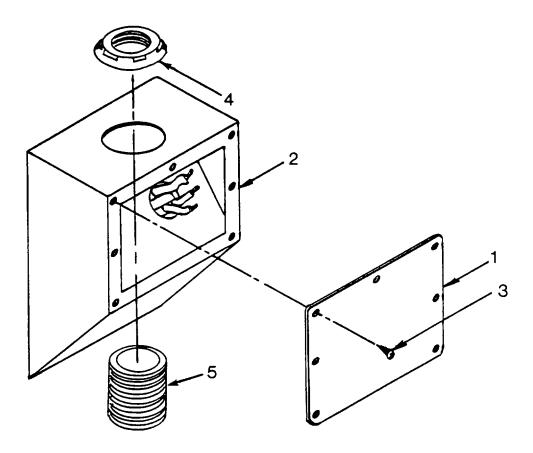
Main Power Cable Receptacle Assembly (Inside Shelter)
